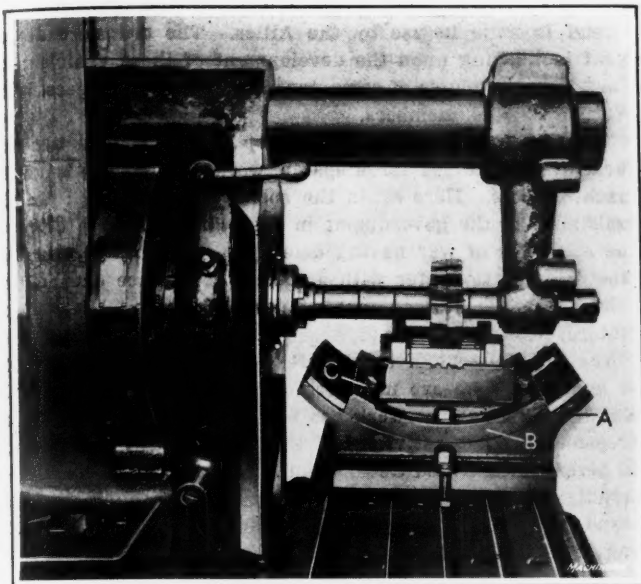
Milling Steps D and E of Belt Shifter shown in Fig. 5
